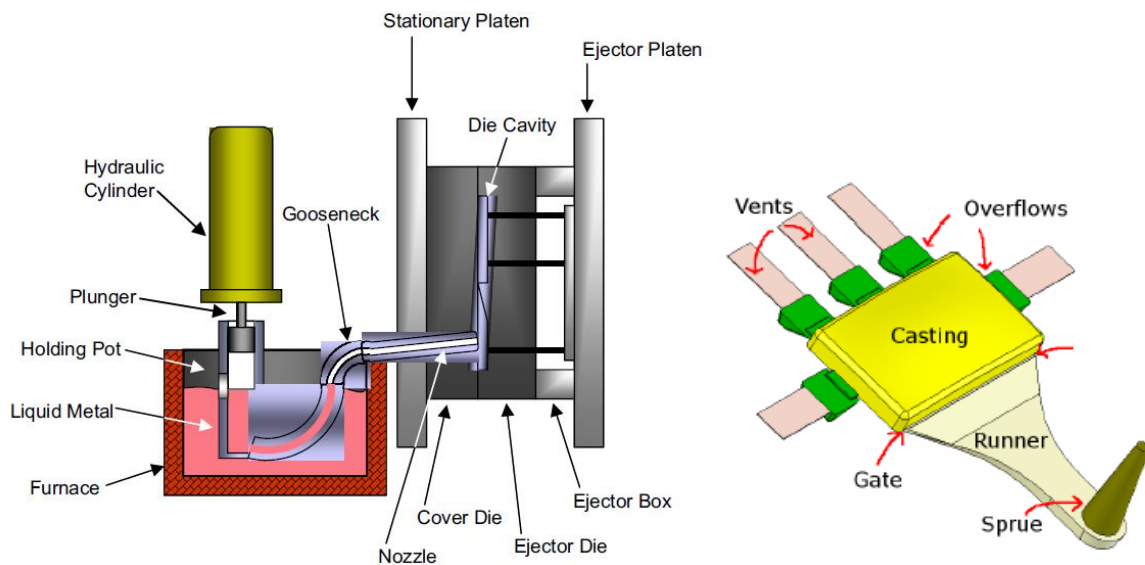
Left: Schematics of a conventional HPDC hot chamber machine [14]; Right: Components produced by a hot chamber machine [22].
